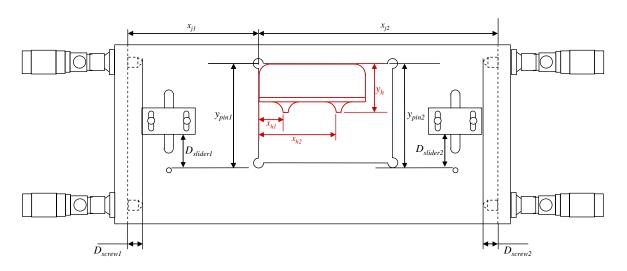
Schematic of ear with bonding jig with critical reference dimensions
